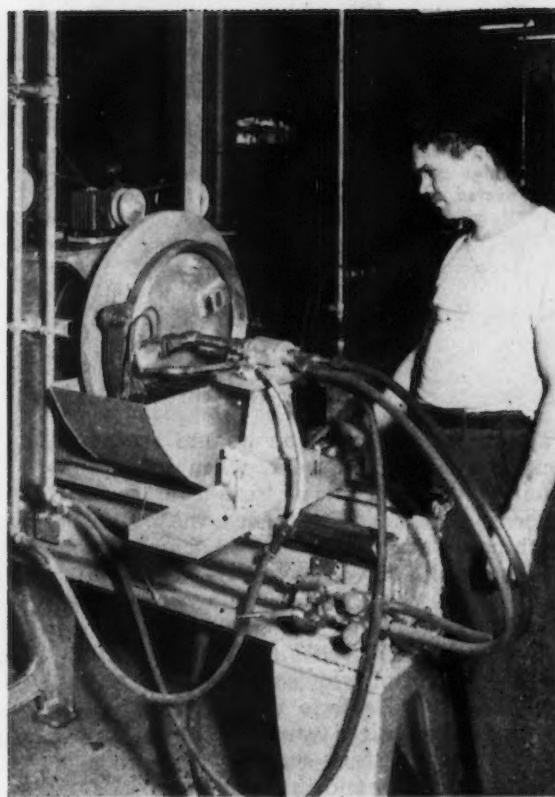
In this machine, a ring whose bearing face is to be hardened is fastened to a rotating face plate and an oxyacetylene flame is applied. Just below the flame is a jet of quench water that plays on the surface just heated. Further cooling occurs in the water tank.
